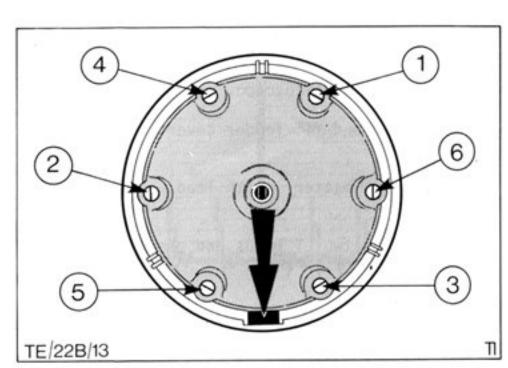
Breakerless distributor cap showing HT lead connections as viewed inside cap. Locating lug arrowed.
